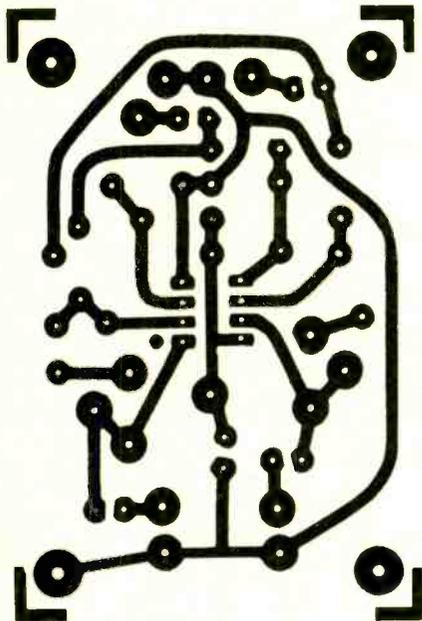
FOIL-SIDE VIEW of the printed-circuit board layout used to mount the components for the M-1 Matrix Stereo Decoder. Layout is simple enough to use perboard material, however, the printed-circuit board is much neater.
